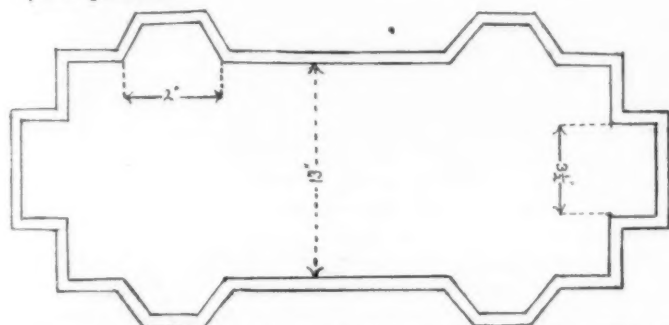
SHOWING PATTERN OF IRON FRAME USED IN MOLDING CAST ALUMINUM PLATE WHICH, WHEN COMPLETED TO BE USED ON 16 x 11 FLASK.
